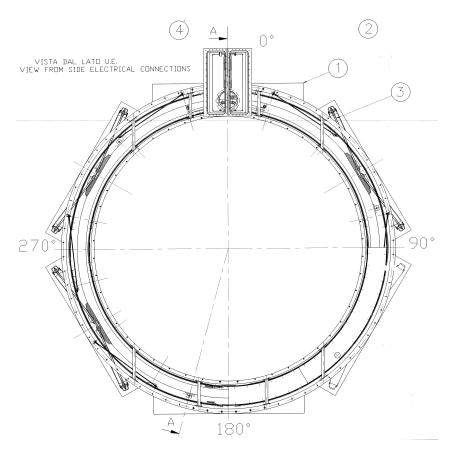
Original Ansaldo drawing: Cryostat Assembly
